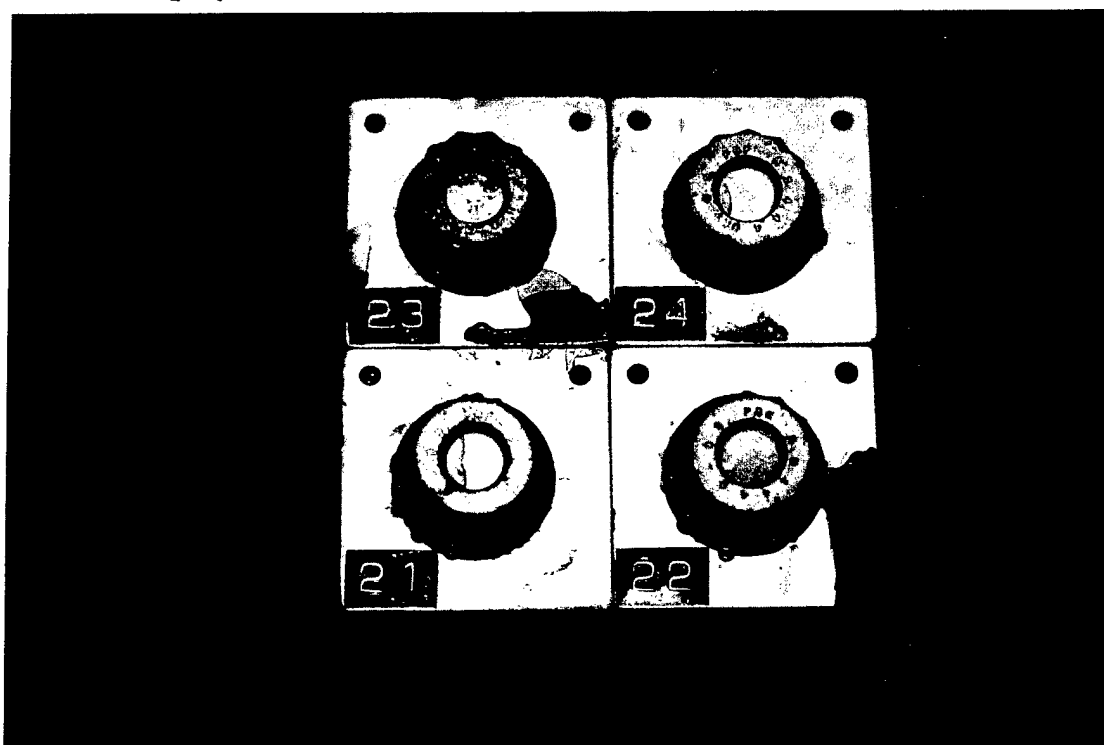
H11 Chromium Hot Work Tool Steel Bolt Heads With Cadmium Electroplate After 30 Days of Salt Spray. Reduced 25%.
